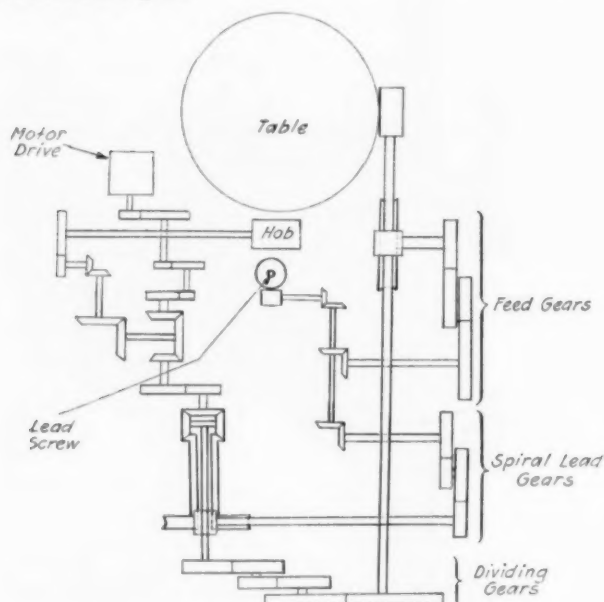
SHOWING ARRANGEMENT OF HOBBER GEARING
